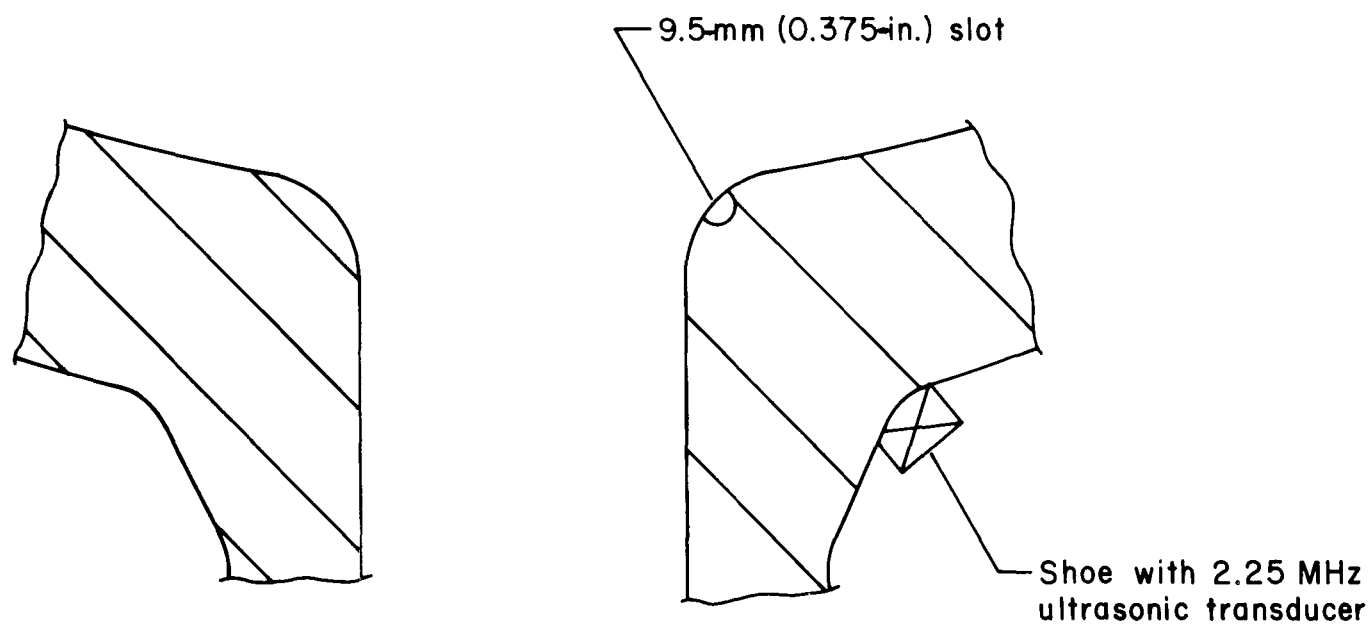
Cross-sectional view of large-nozzle mock-up for air storage vessels.
